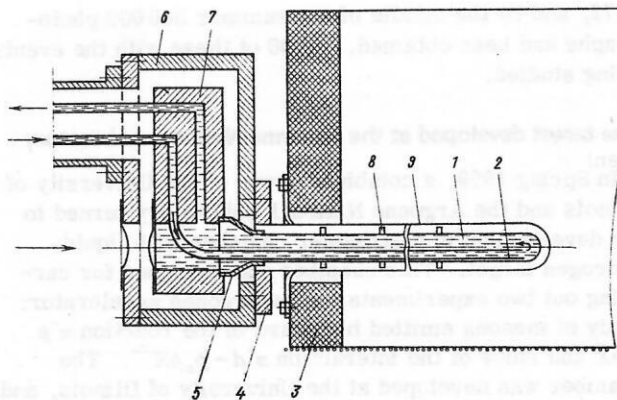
Construction of target. 1) Inner container; 2) inner tube; 3) side wall of streamer chamber; 4) flange; 5) adapter ring; 6) adapter vacuum box; 7) base plate; 8) nylon supports; 9) vacuum jacket.
